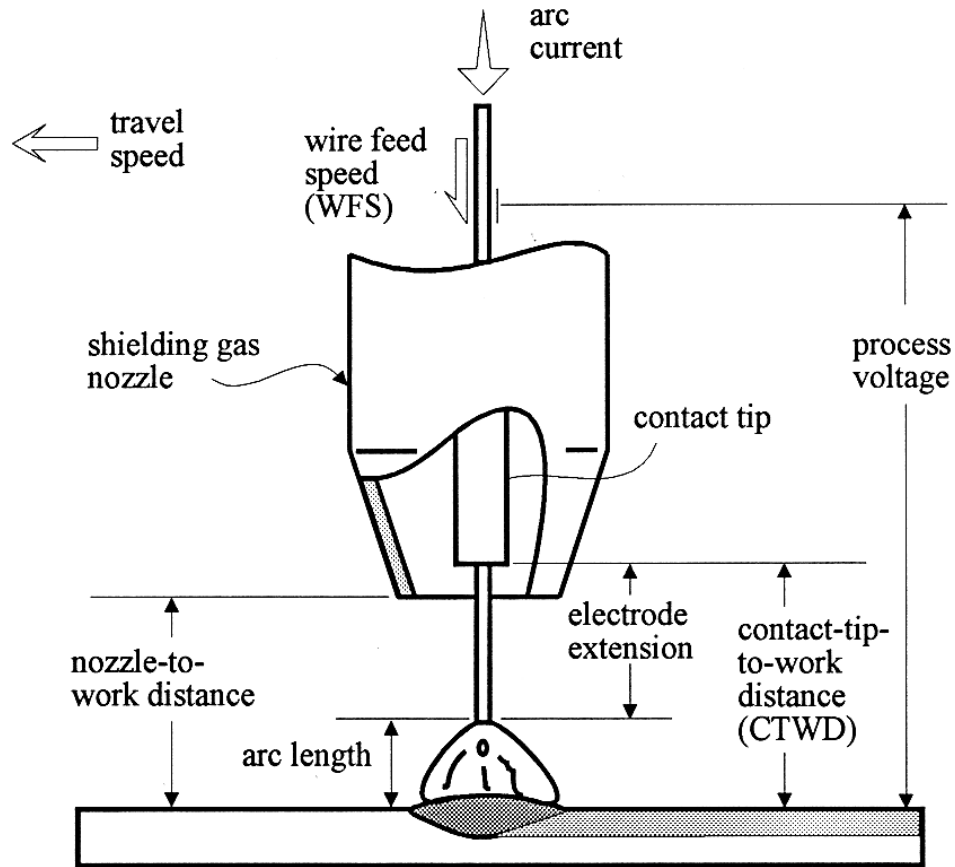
GMA welding parameters and terminology. [10]
